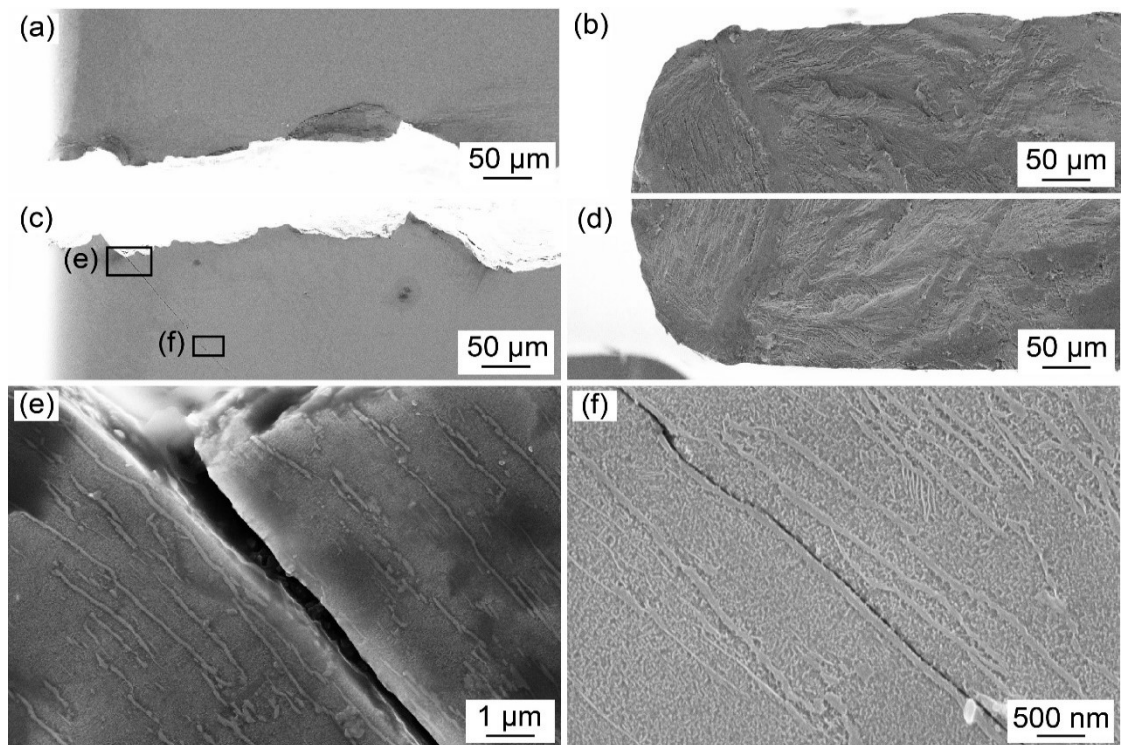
The crack initiation location of specimen aged at 550 °C for 5 h. The side views (a) and (c) and the fractographies (b) and (d) of the crack initiation location. (e) and (f) The high magnification images of the places marked in (c).
